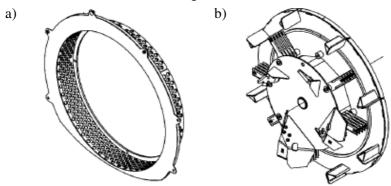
Tomahawk 404 cutting implements: a – screen; b – cutting mechanism with hammers
